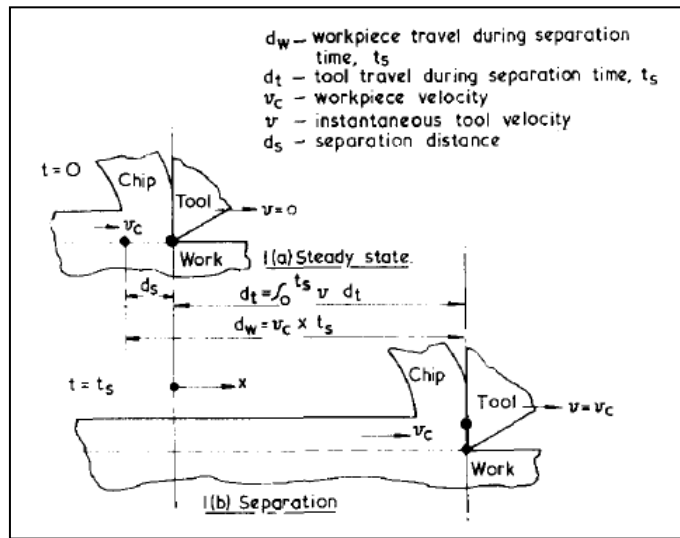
Scheme of the tool-workpiece separation process [30].
